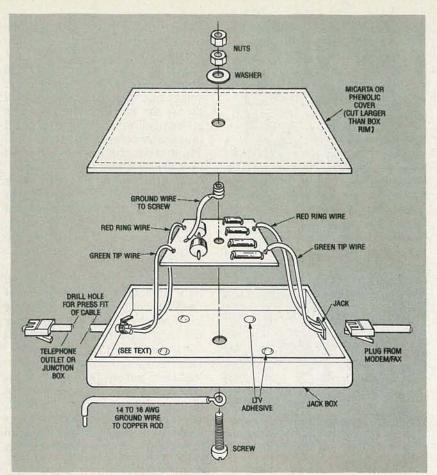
MODEM/FAX PROTECTOR ASSEMBLY. Note the location of the hole formed for the 4-wire telephone cable. Only the red and green wires are used; the others are cut off near the cable clamp. The assembly is set on four spots of RTV adhesive, and the cover is held on with the central screw, nuts and washer.
